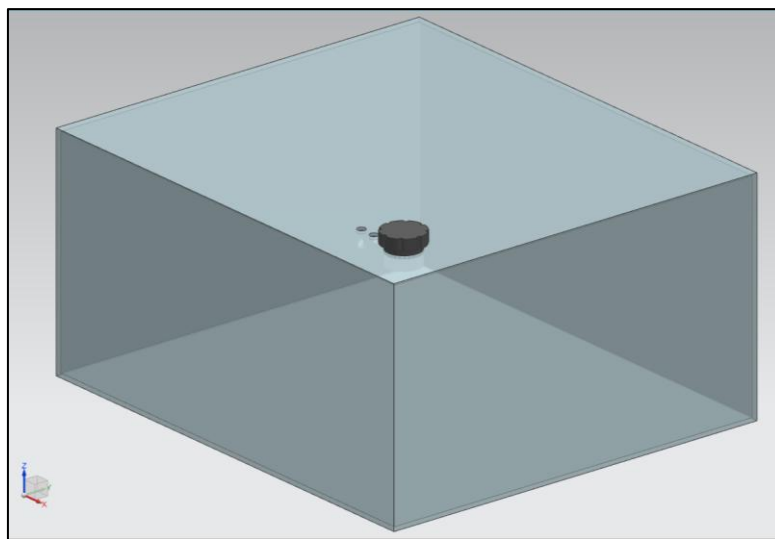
Fuel Tank CAD Modelled in UGNX 12.0
